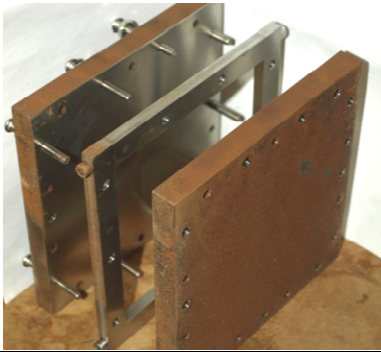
Sample Mould – Expanded view one of the moulds used to construct the mesoglass. The thickness of the middle spacer piece determines the thickness of the sample. The dimensions the mould used were 10 cm by 10 cm, with a thickness of 2.38 mm.
